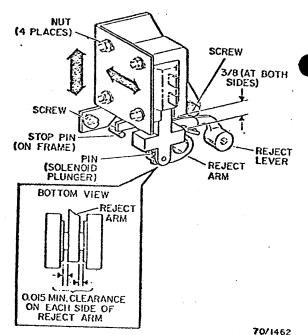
Reject Solenoid (L4) Assembly Adjustment
